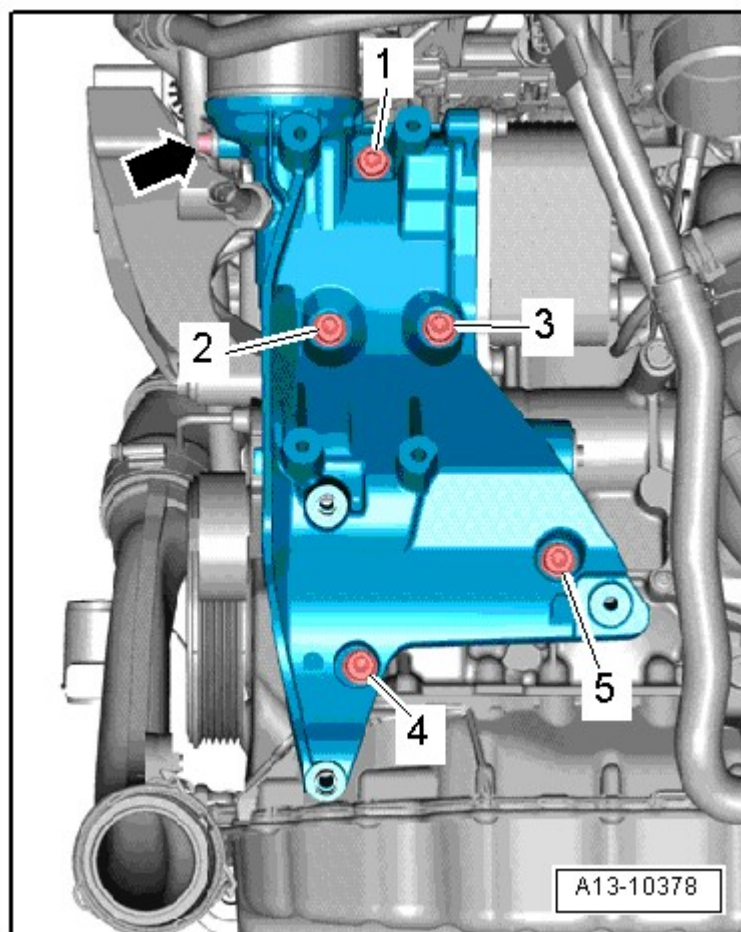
Identifying Accessory Assembly Bracket Tightening Sequence
